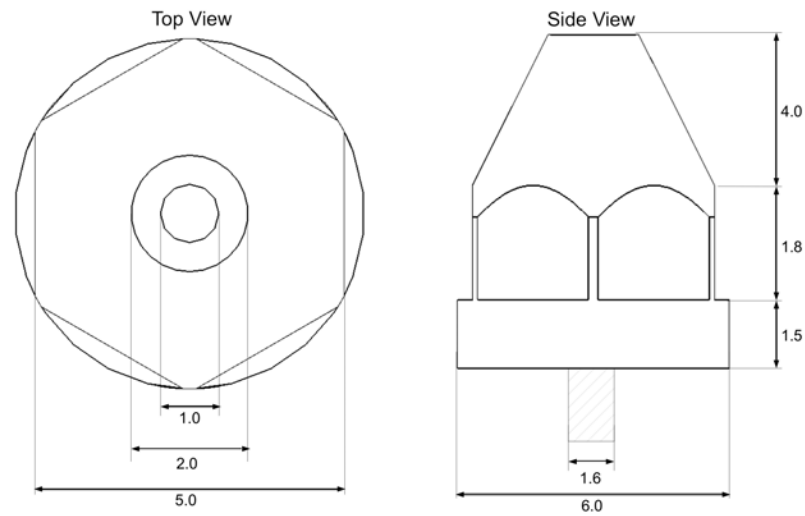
The tip holder used with the nanograph STM is screwed into the STM via a 1.6 mm thread. The holder has a 5 mm hexagon shape so that it can be screwed into and unscrewed from the STM. A 1 mm hole passes through the entire structure and tip wire is held in place by friction in this hole, for example 0.5 mm wire might be doubled over at the end or 1 mm wire may be used for an exact fit. All measurements are in mm.
